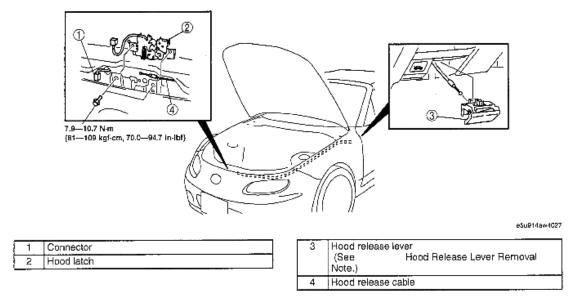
Identifying Hood Latch And Release Lever Remove/Install Components With Torque Specifications
